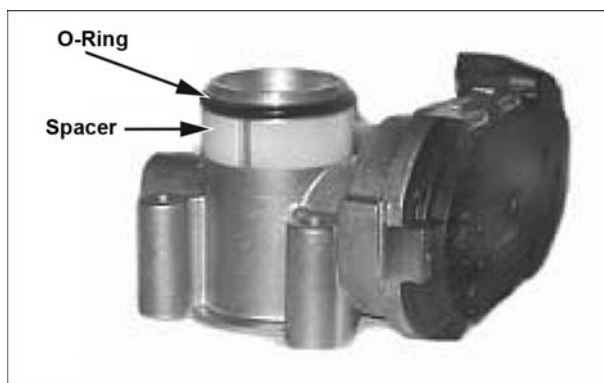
O-Ring and Spacer Within Mixer Adapter Assembly
